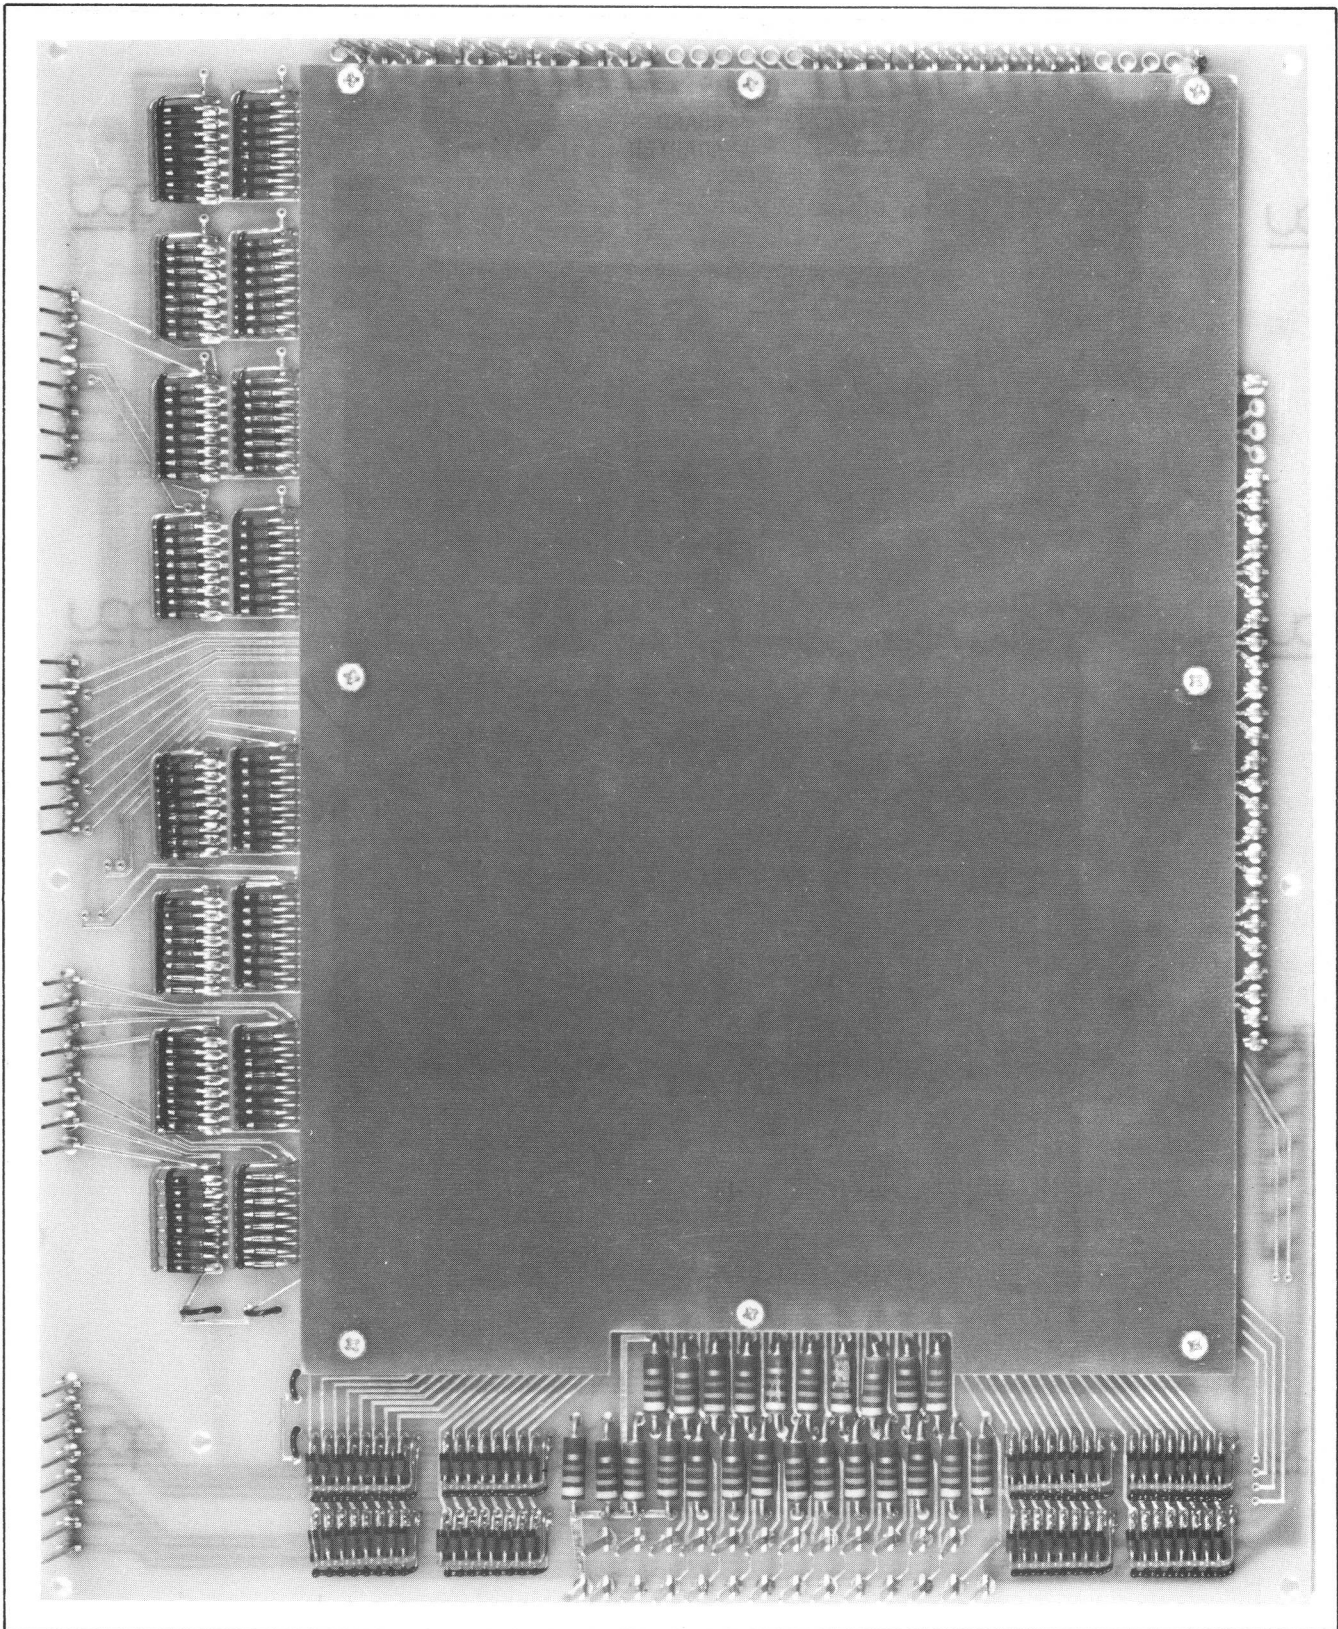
CDP-8KX16 Magnetic Core Memory, Core-Plane Assembly
